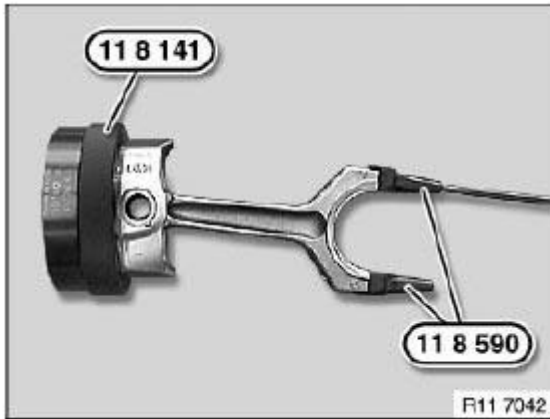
Identifying Special Tools 11 8 590 And 11 8 141
